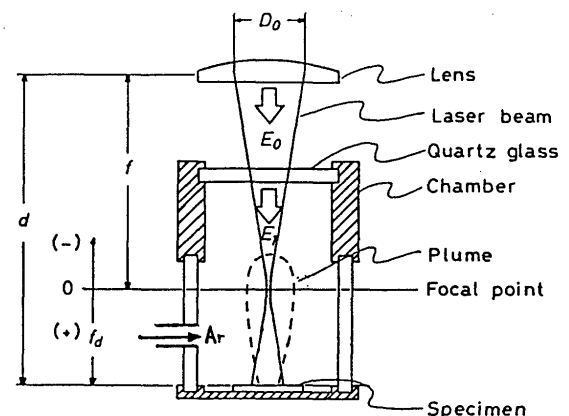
Experimental configuration for pulsed Nd: YAG laser spot welding of single crystal specimens.
